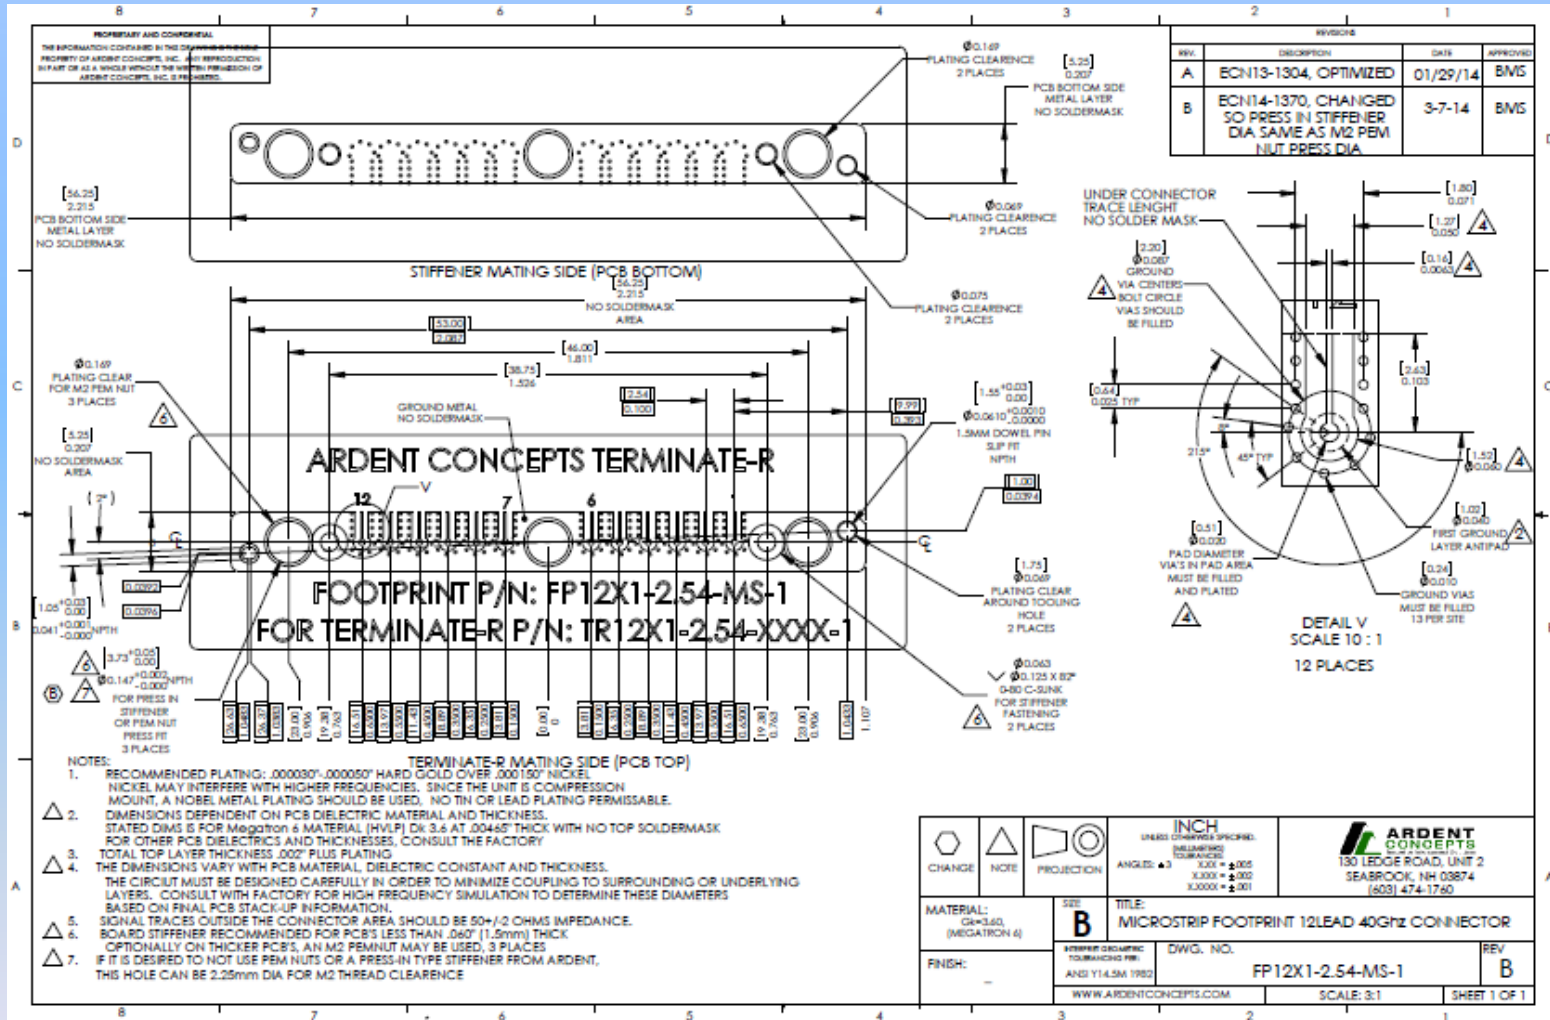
Terminate-R Micro Strip Footprint(2.54mm)
